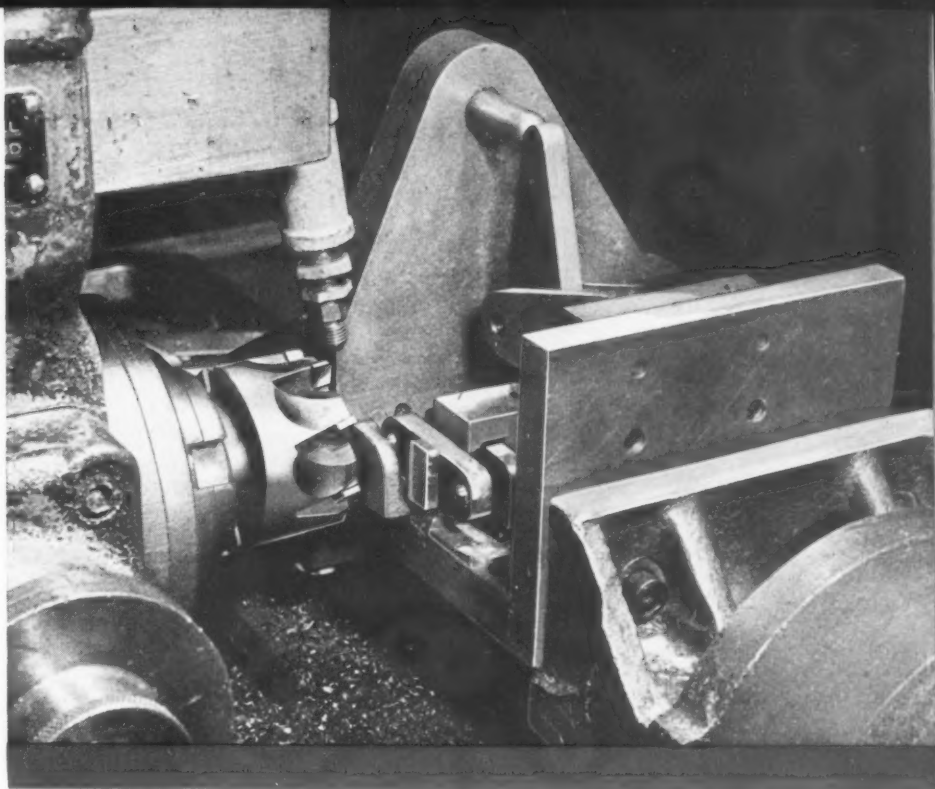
shows the same cutter mounted on another Milwaukee vertical milling machine for milling four bosses  $1 \frac{3}{8}$  inches in diameter on a forging of S A E 4130 chromium-molybdenum steel. These parts have a hardness of 210 Brinell. The cutter is made with twelve teeth, it being common Lockheed design to make the number of teeth two more than the cutter diameter, as already mentioned. Both the rake and helix angles are 10 degrees negative and the tips are Kennametal. In the operation shown, the spindle speed is 247 R.P.M., and the table feed is  $17 \frac{1}{2}$  inches per minute, which gives a feed of 0.006 inch per tooth. The depth of cut is  $\frac{3}{16}$  inch. Application of a negative-rake milling cutter for this job has resulted in a production increase of 200 per cent over the output obtained with a high-speed steel cutter.
